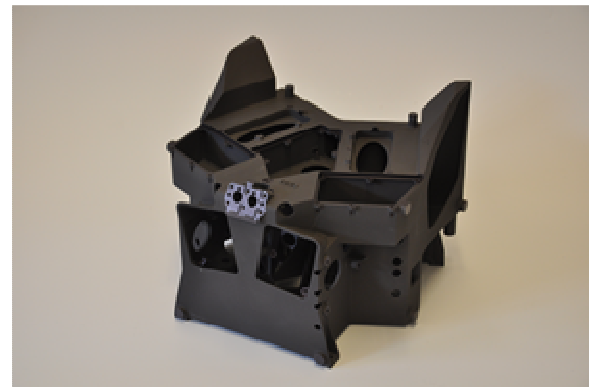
SINPLEX prototype housing after casting and mounting surfaces machining and anodizing treatment
